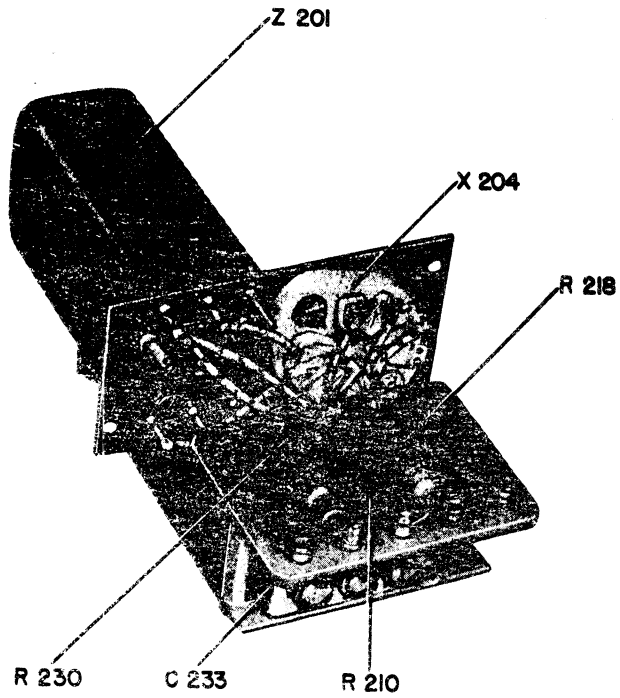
Receiver 1st I-F Assembly—Bottom View
